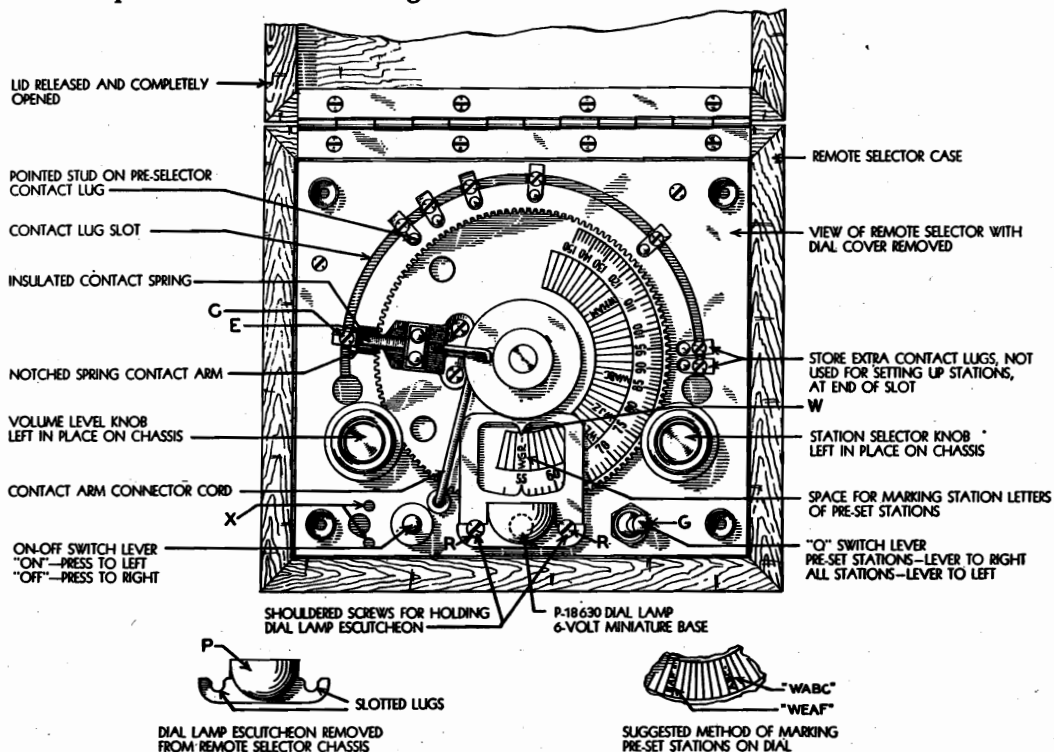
Remote Selector Unit of No. 55 Te-lek-tor-et with Dial Cover removed for setting Pre-Selector Mechanism.
